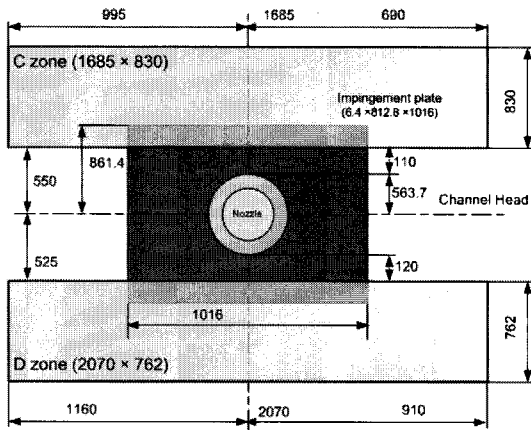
Schematic drawing of shell cutting area for 6A heater
